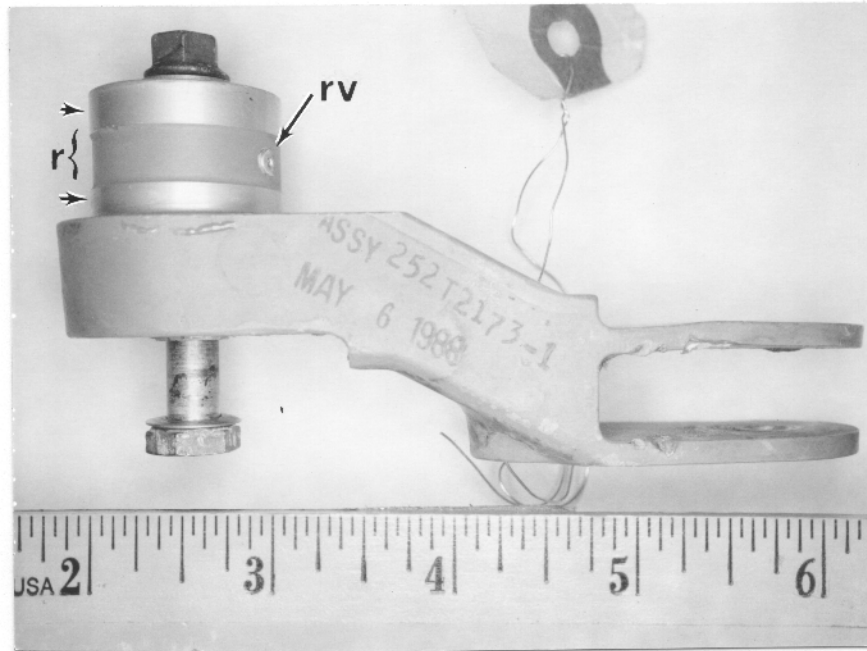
The side view of the outboard arm from bellcrank #5 showing the two bearing surfaces by unlabeled arrowheads, the recessed area by bracket "r", and the sheared rivet by arrow "rv".
